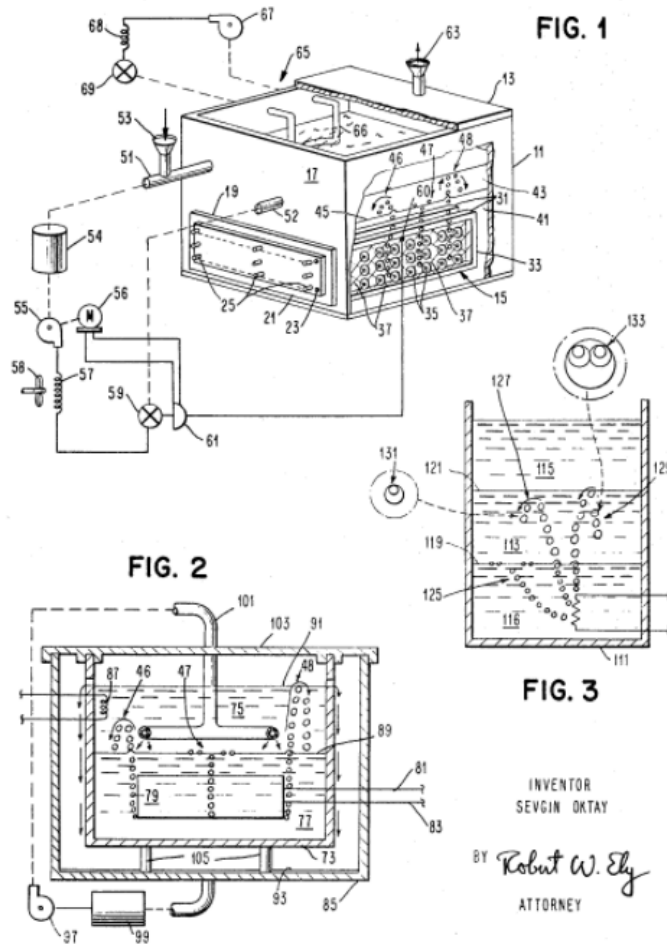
Section and exploded views of the entire system, S.Oktay's patent [149]
